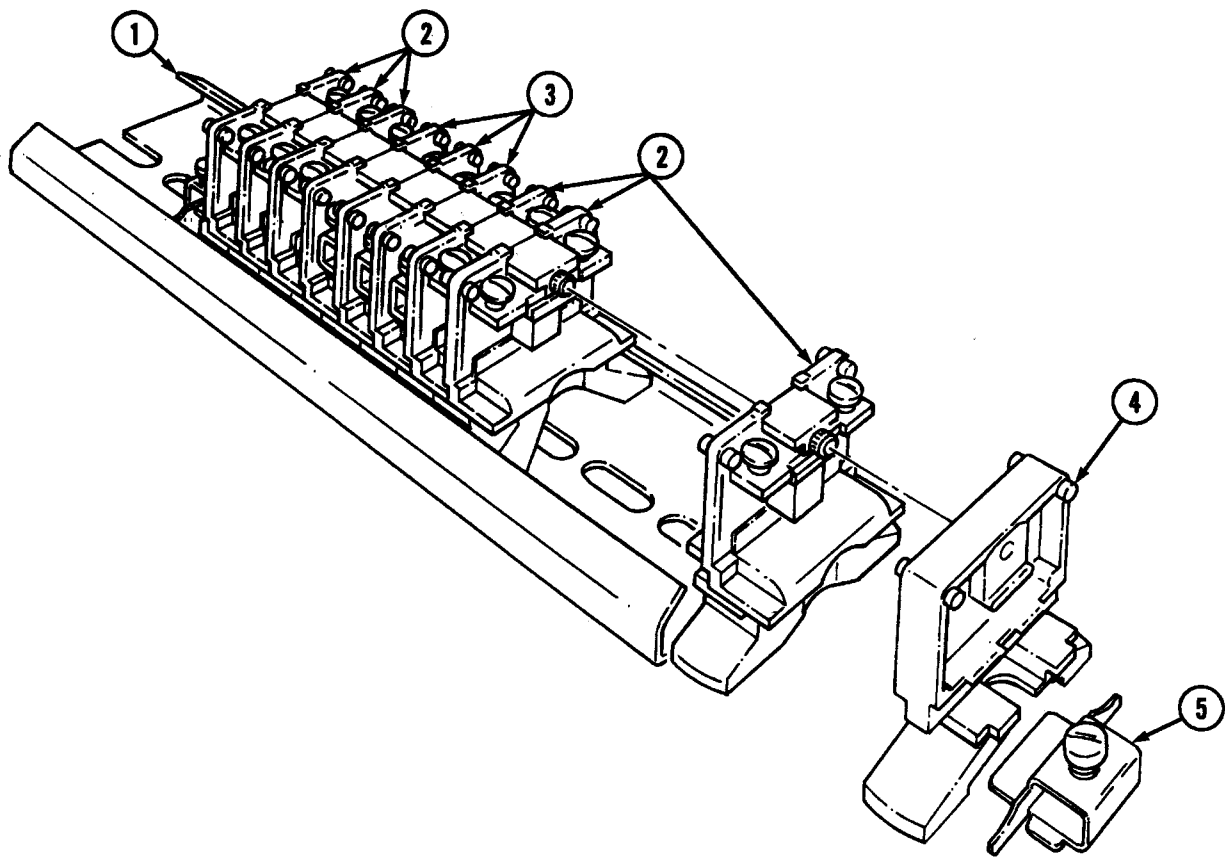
Channel, 7.00-in. and Terminal Block Assembly.
